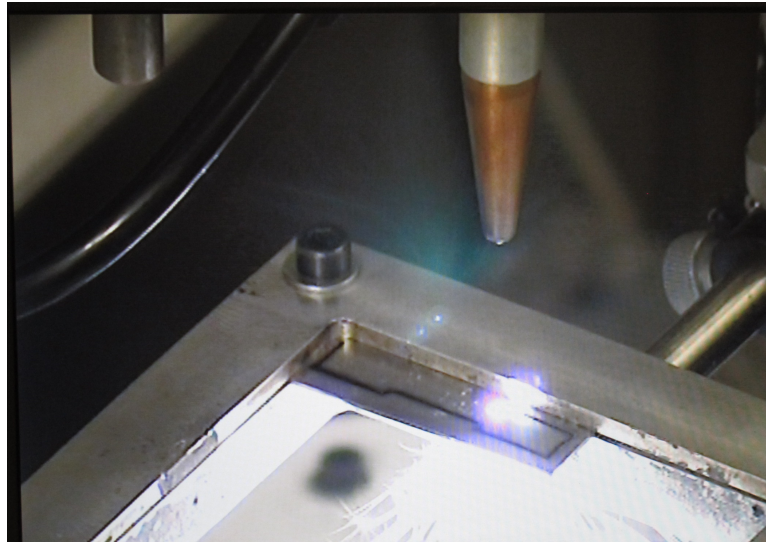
Sample cut with laser to achieve the desired geometry for the tensile tests.
